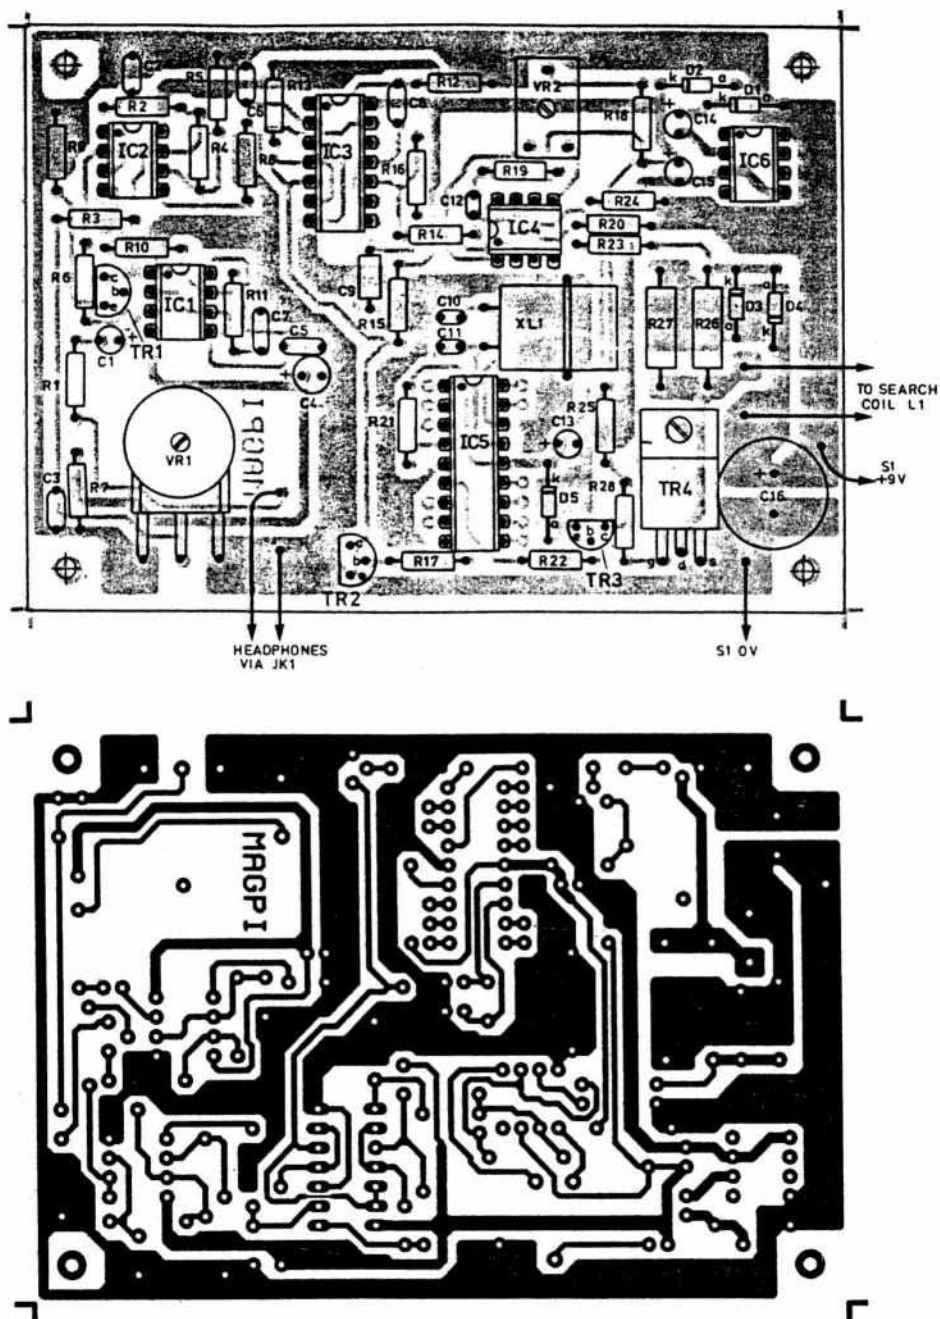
Printed circuit board design and layout for the Treasure Hunter
